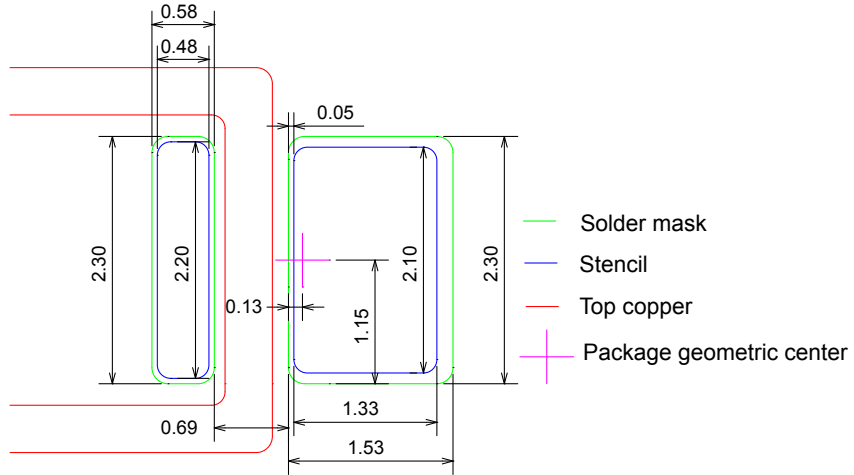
Recommended PCB solder pad layout for LUXEON 3030 HE Plus.
